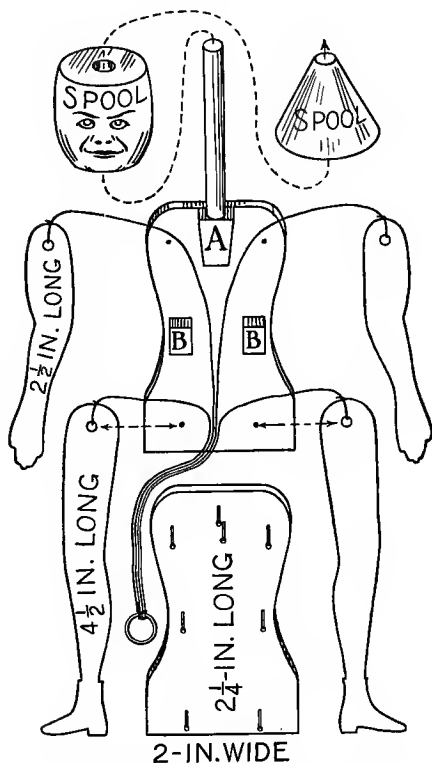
Details of Body of the Jumping-Jack Shown in Fig. 324.
